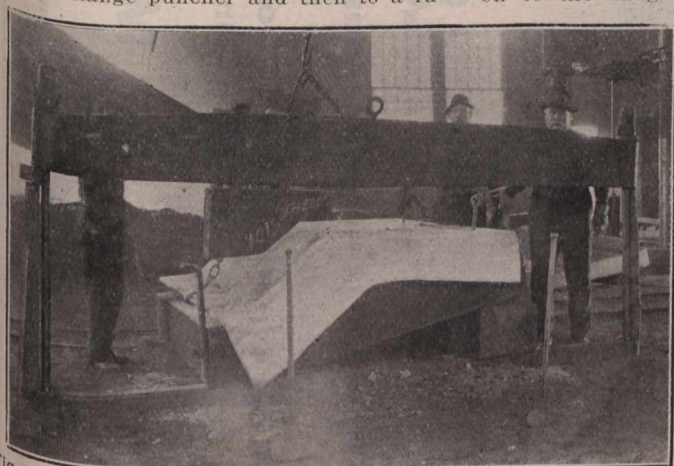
Side-flanging a Throat Sheet by Hand on a Formed Flanging Block.
